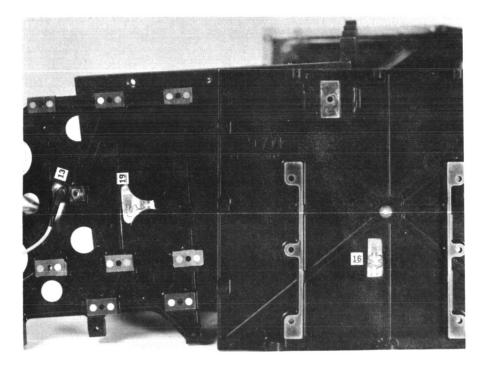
Location of Instrumentation on Side Panel and Circuit Board Mounting Plate
